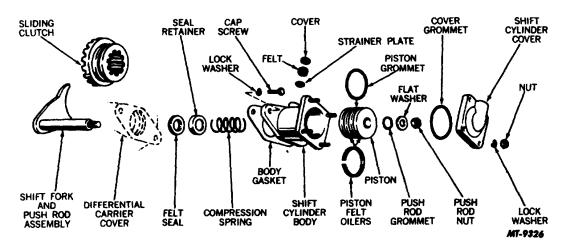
Air-Operated Lockout Mechanism (Exploded View)
